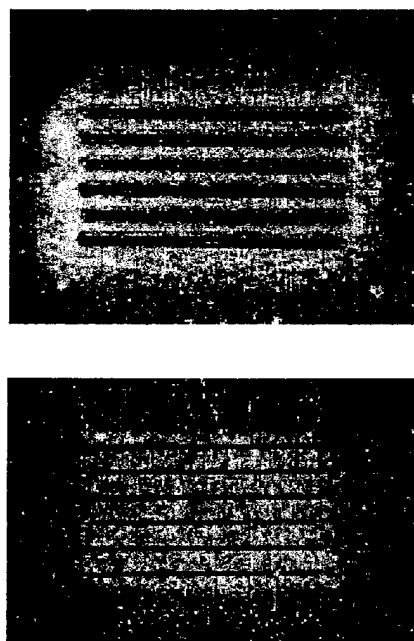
Laser machined lines in 90- μm -thick stainless steel. Top photo shows front side while bottom photo shows back side.
